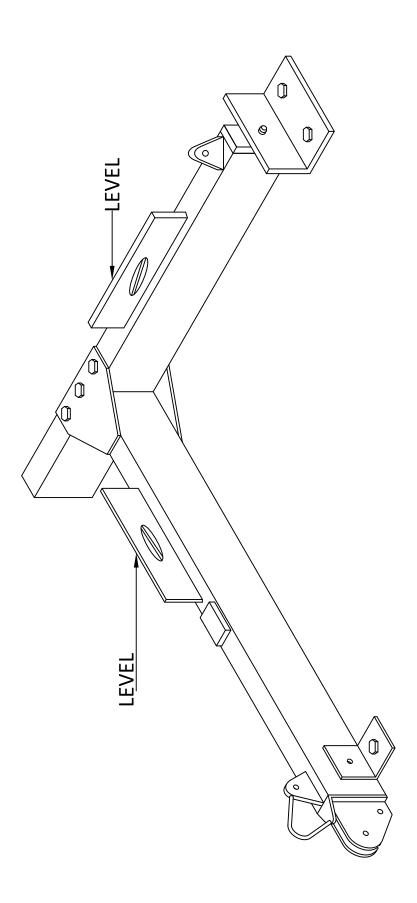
ADJUSTING MG-30/40 BASE TO LEVEL POSITION (Ref. Section 7.1.5)
